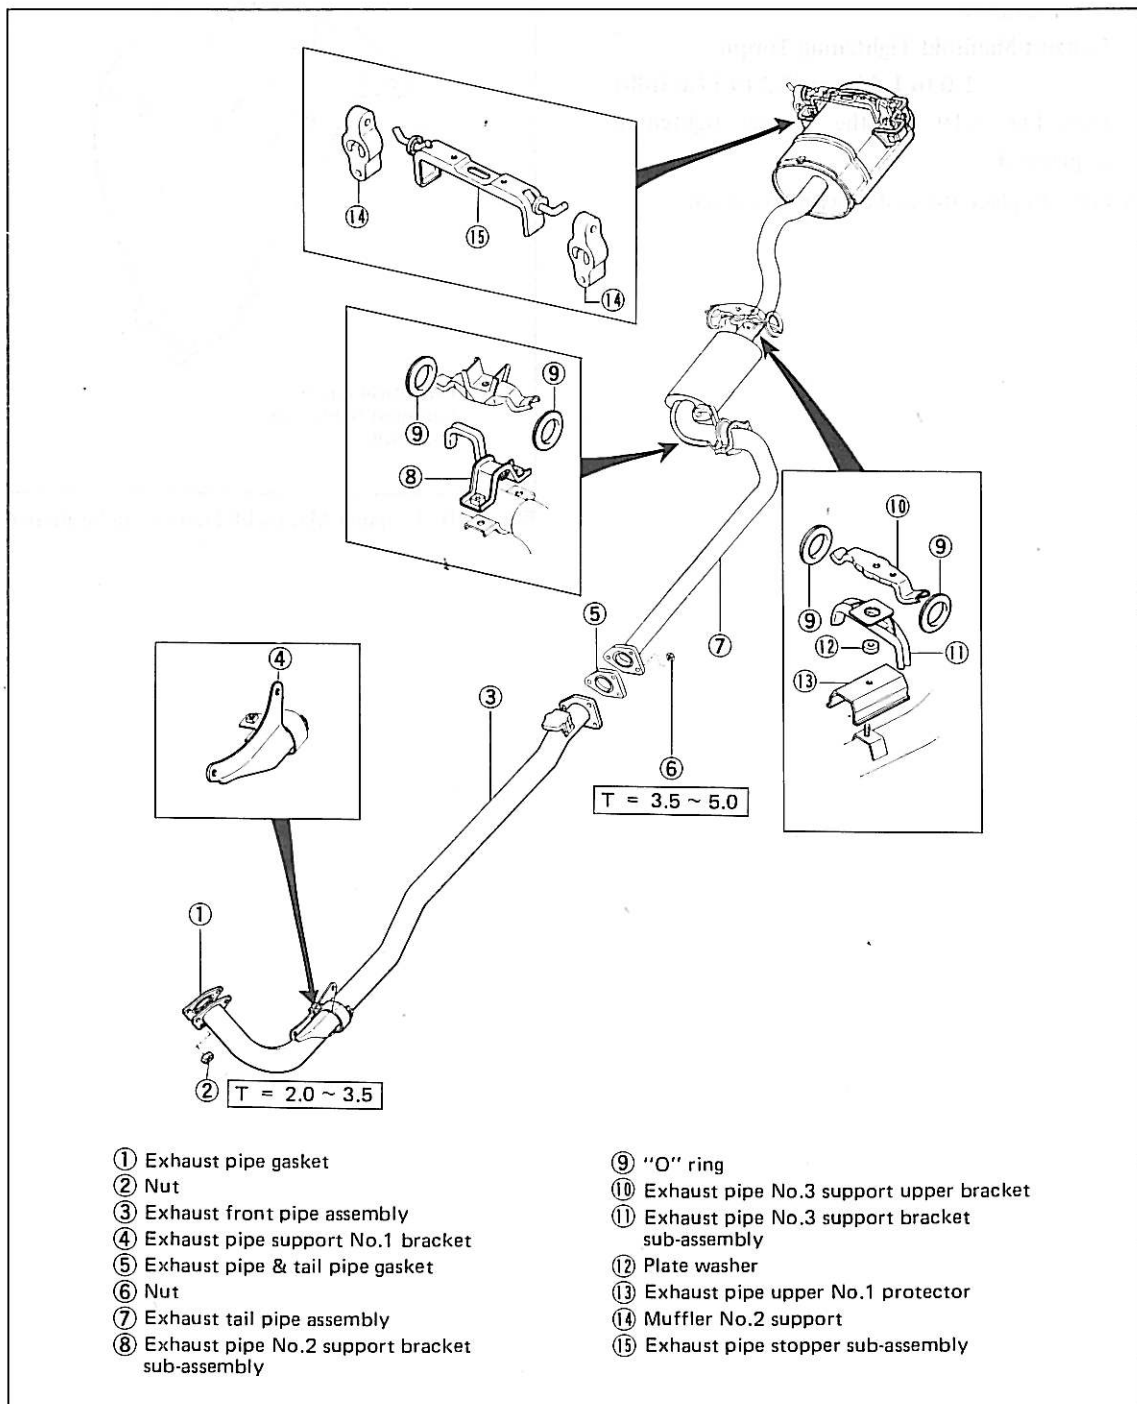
Exhaust Pipe Components and Tightening Torques
